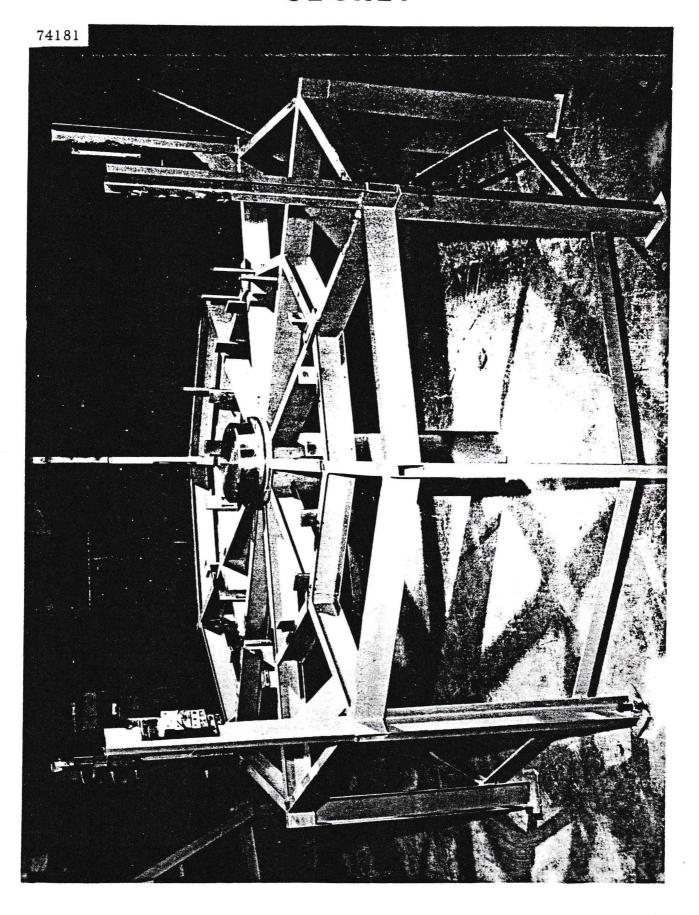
ASSEMBLY JIG FOR UPPER AND LOWER ROTATING STRUCTURES
